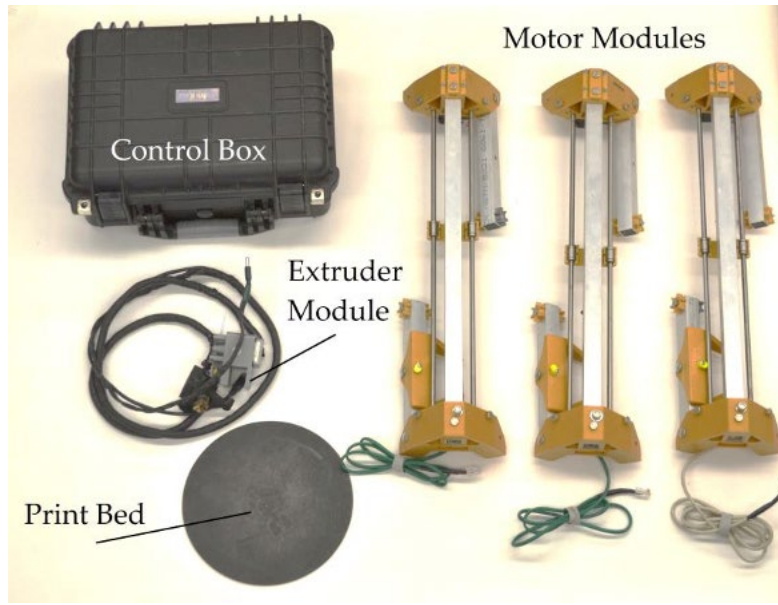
Kijenzi 3D Printer Disassembled Control Box and Printer Bed.
